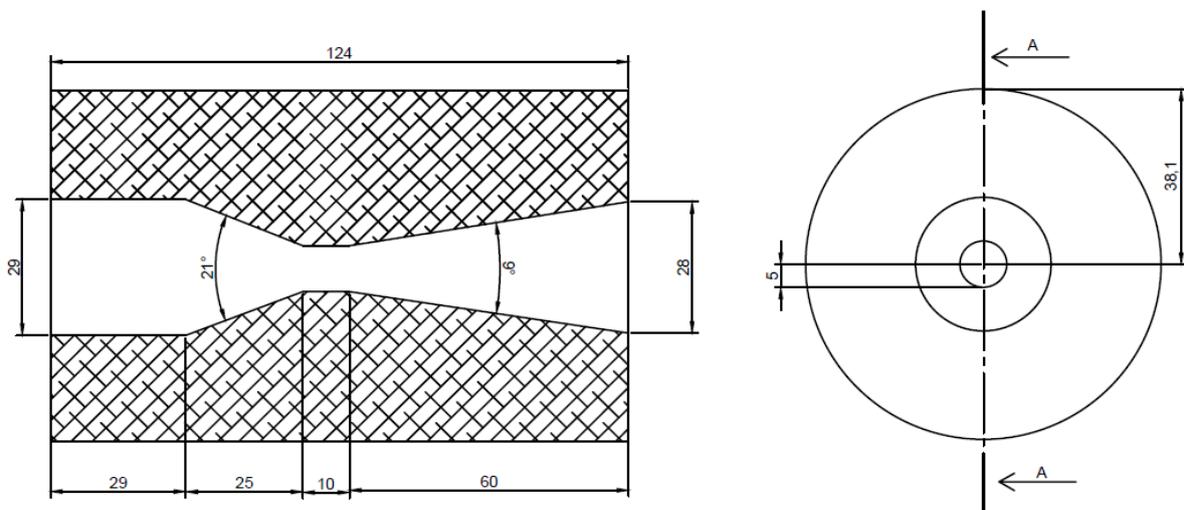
Drawing of the machined Venturi Tube adopted in the test equipment developed (all dimensions are in mm).
